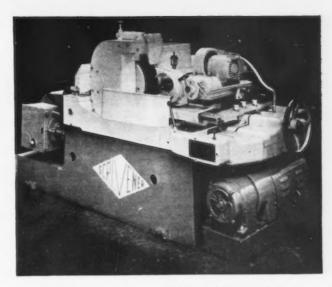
Scrivener piston grinding machine which automatically produces an oval contour tapering to a full circle.
